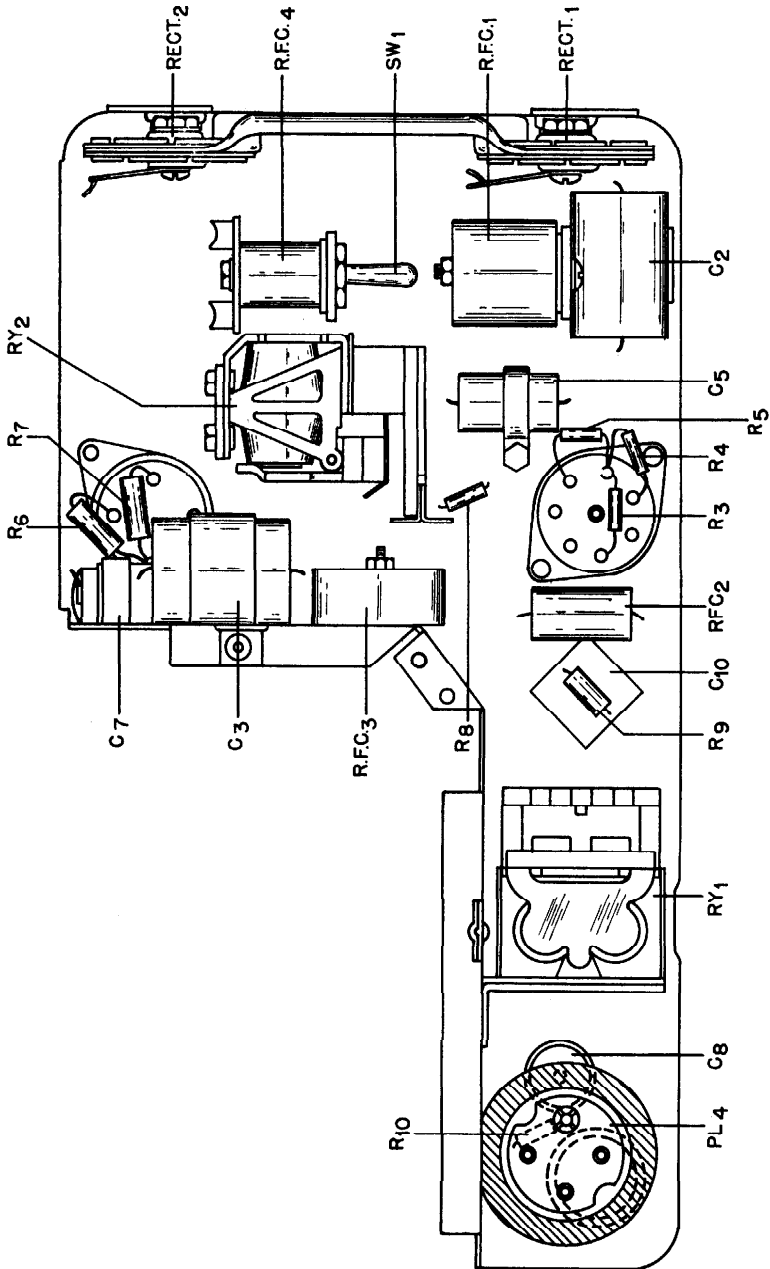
Power Supply Unit PE-157-(\*), Bottom View, Showing Major Parts
